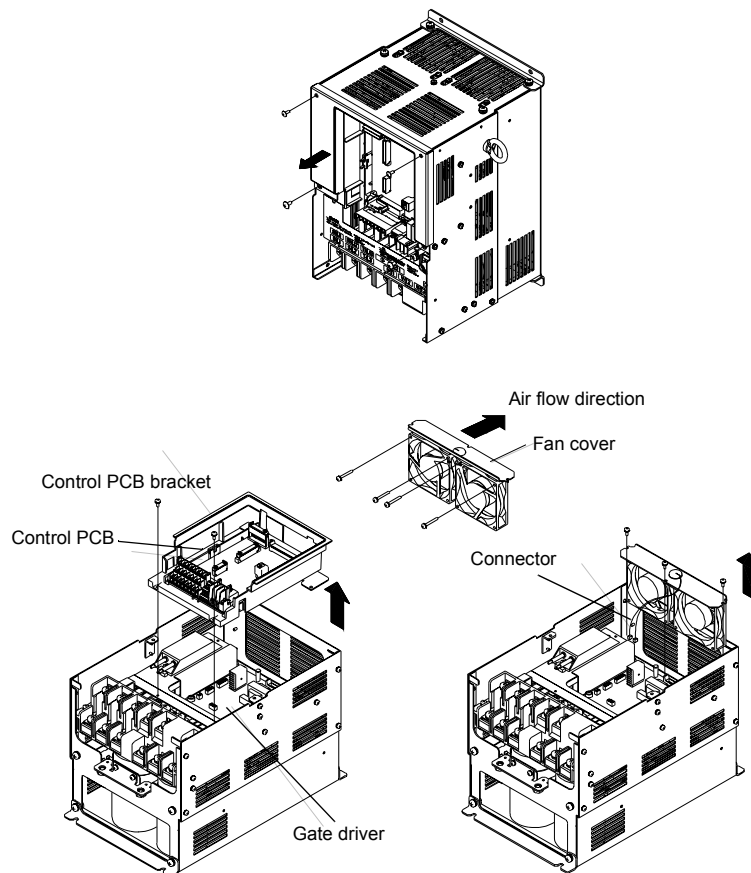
Cooling Fan Assembly Replacement Procedure
